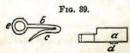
Sear-spring, half size, two views. a, blade; b, upper branch: c, lower branch; d, stud; e, screw-hole.
